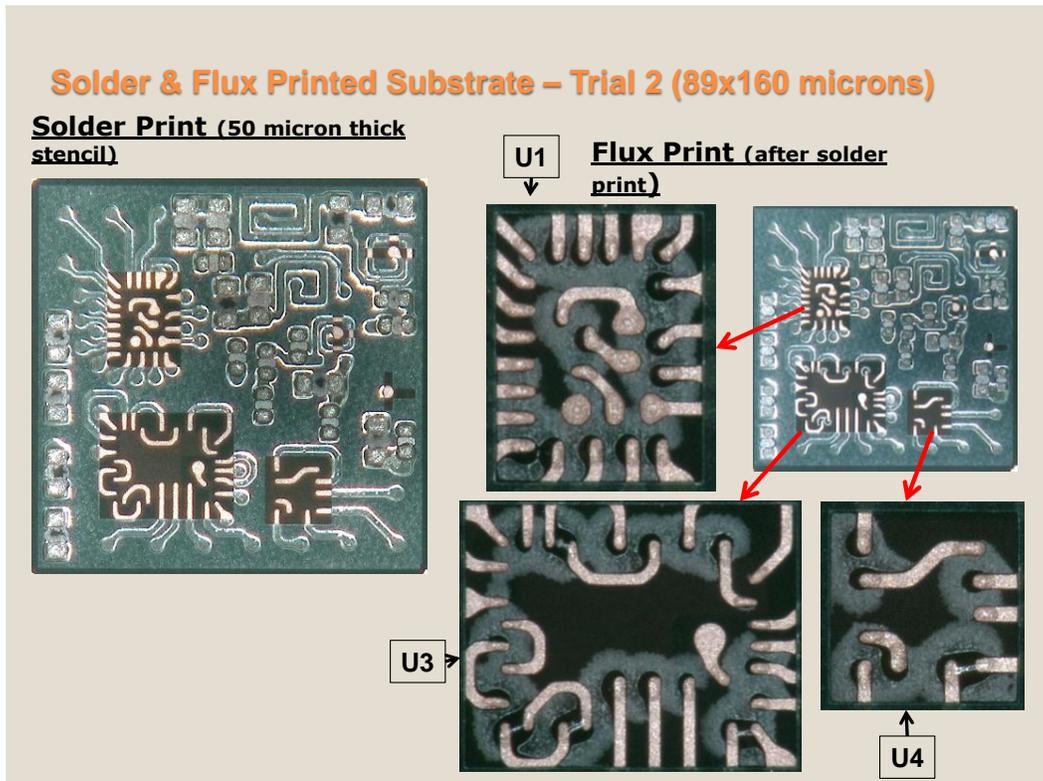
Solder paste print (1st stencil) and Flux print (2nd stencil)
